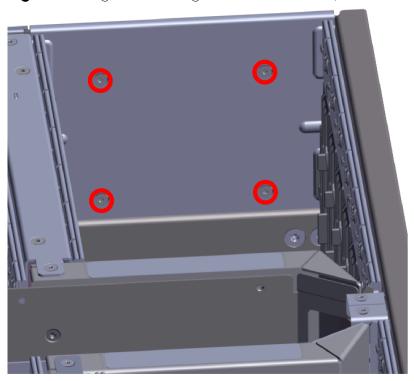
Right Drive Cage Screw Location (Inside of the Chassis)
